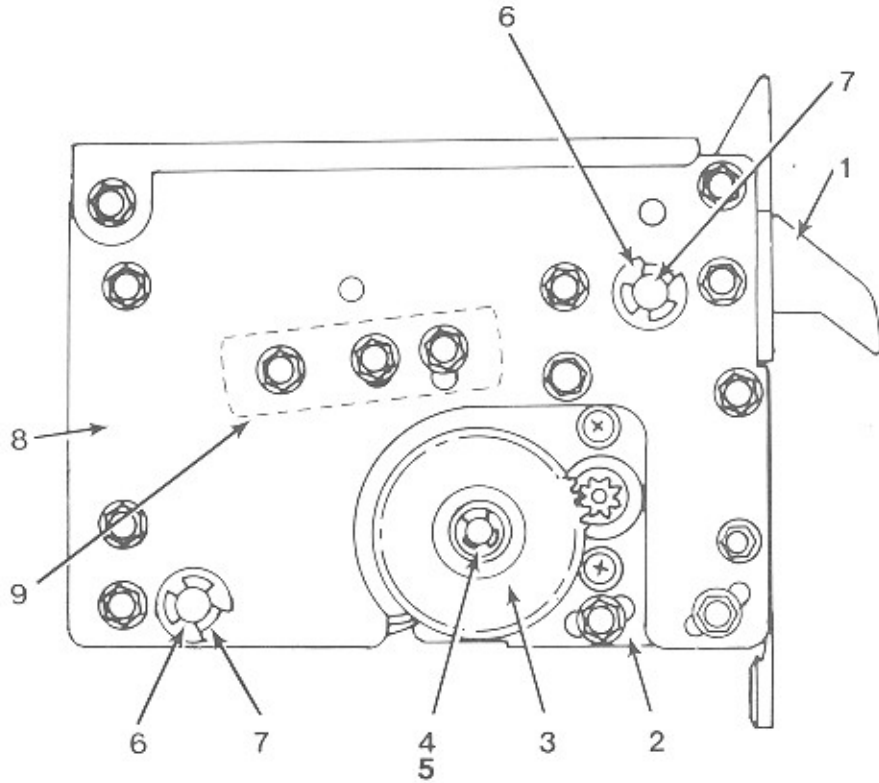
8. OBA-2 Transport Assembly (Sheet 3)
